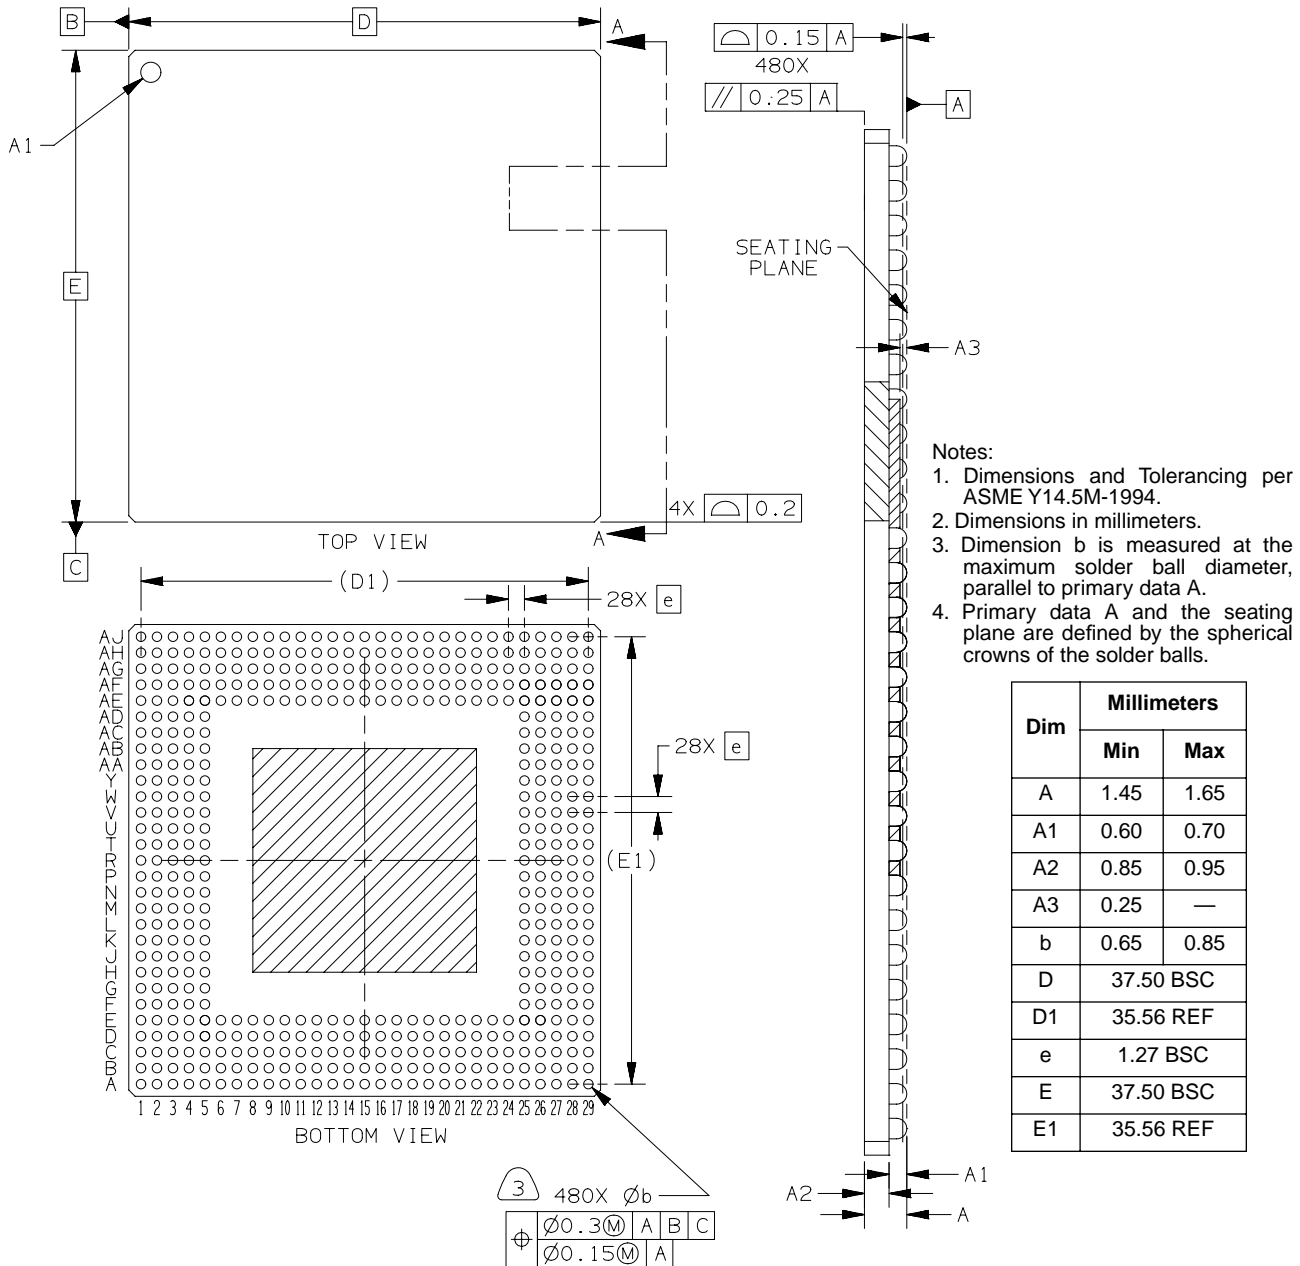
Mechanical Dimensions and Bottom Surface Nomenclature
